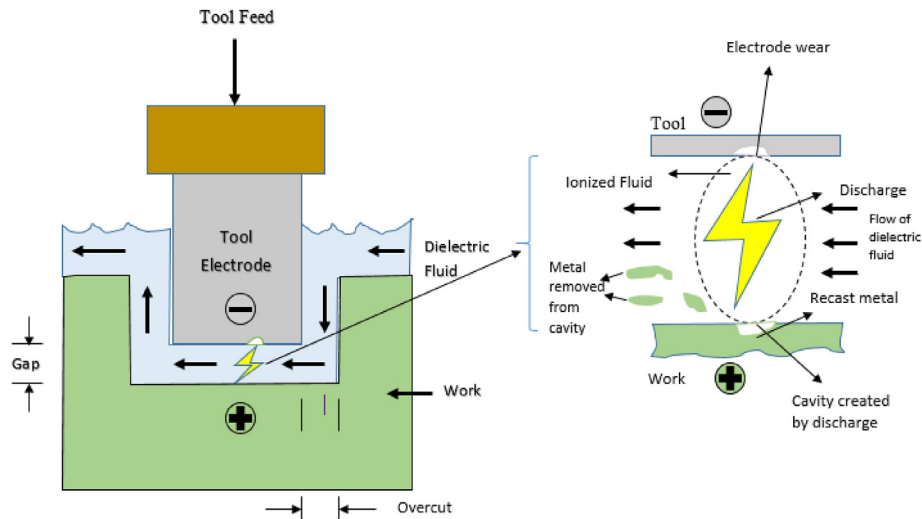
Representation of tool-workpiece interface and machining zone in die-sinking EDM.
